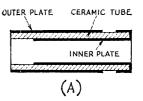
Sketches showing the construction of a typical tubular compensating capacitor.
